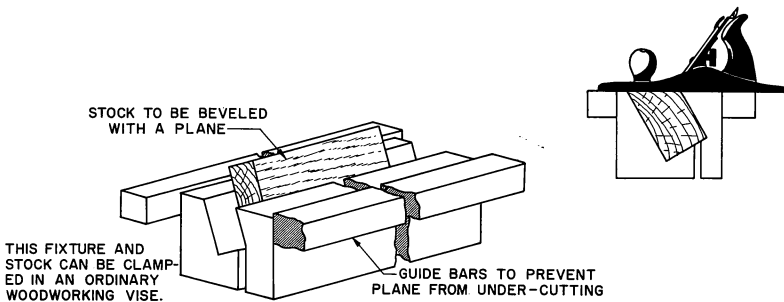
Fixture to Hold Stock for Planing and Later for Sanding
